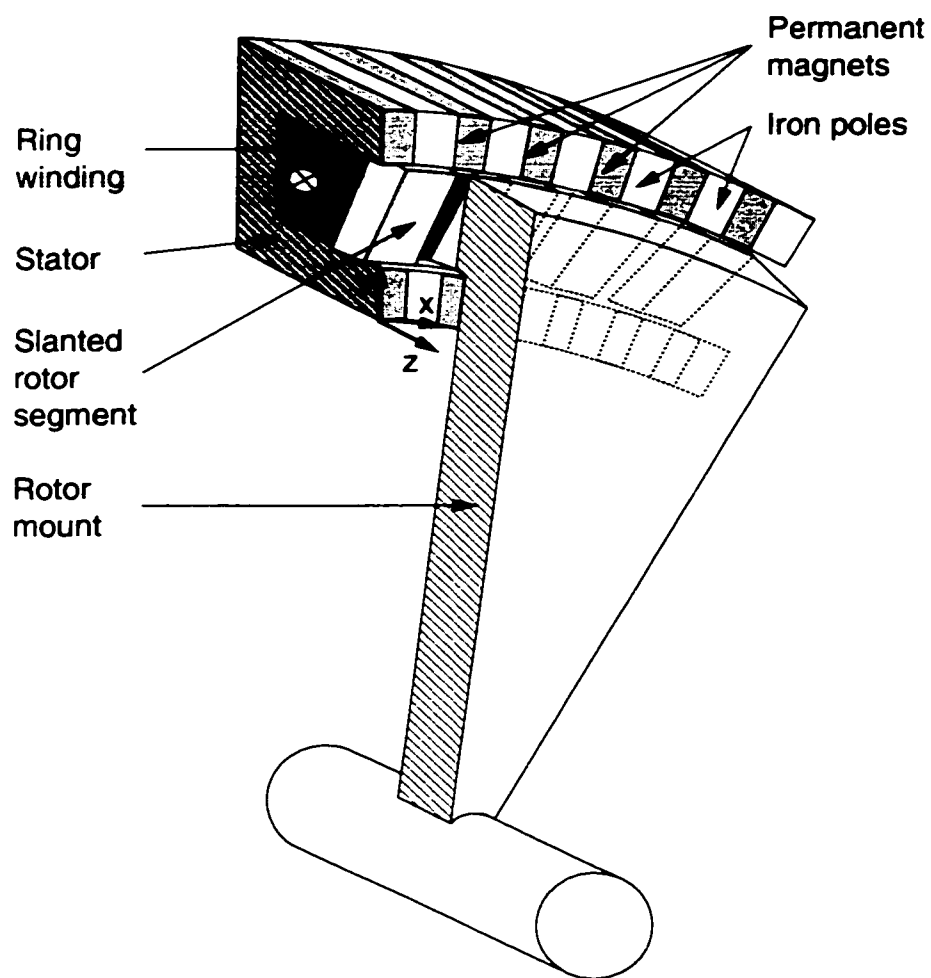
Perspective view of the slanted rotor transverse flux motor design shown in rotor position $x = 0.0 \tau_p$
